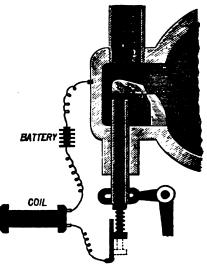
ELECTRIC IGNITER FOR GAS ENGINE-
